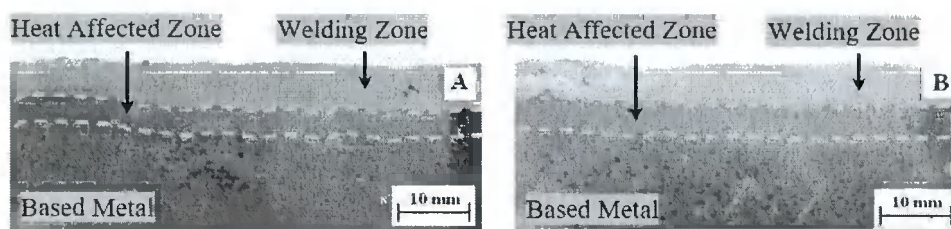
Macrostructure from welding with electrode (A) E110-16G and (B) E1-UM-350
